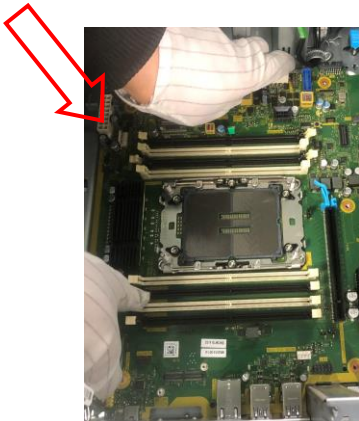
Press the guide and remove the front upper chassis fan and fan guard
